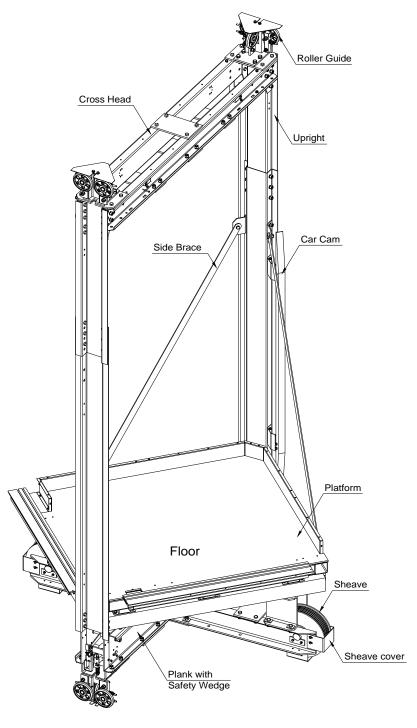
CAR FRAME ASSEMBLY (Underslung Corner post type)
